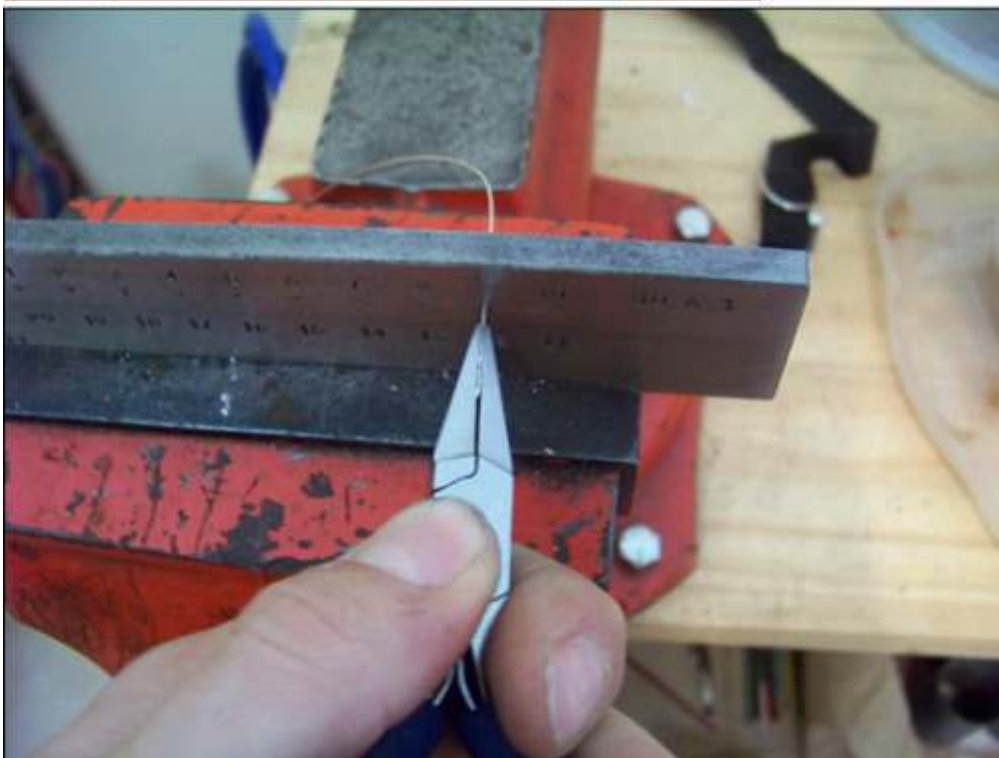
Wire Drawing – First use the large gauge and move to the thinnest gauge
